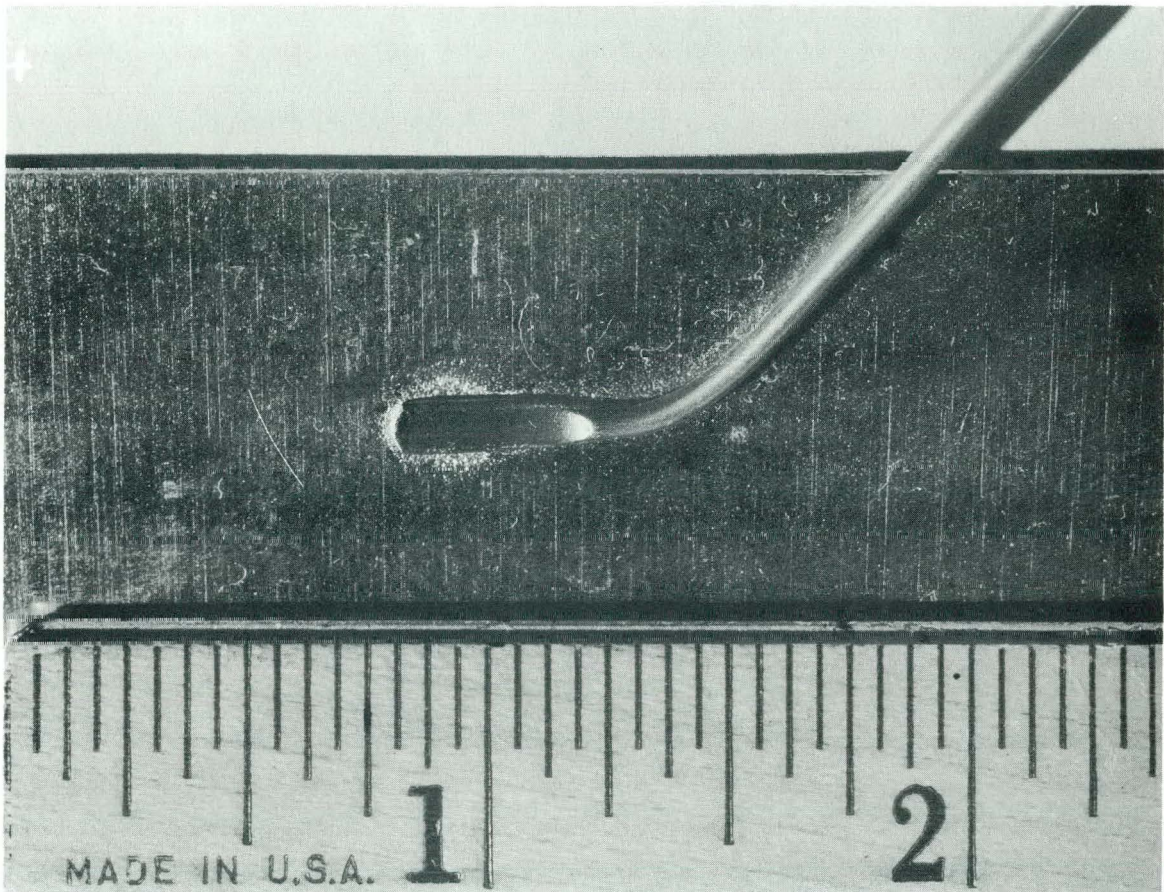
CDTL heat transfer plate - brazed thermocouple.
